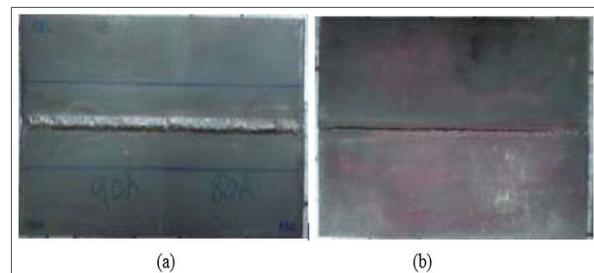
The incomplete fusion occurs on the weld face (a) and weld root (b) for CO₂ sample.
